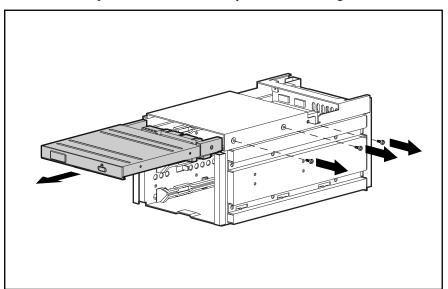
Removing the Low-Profile CD-ROM Assembly
